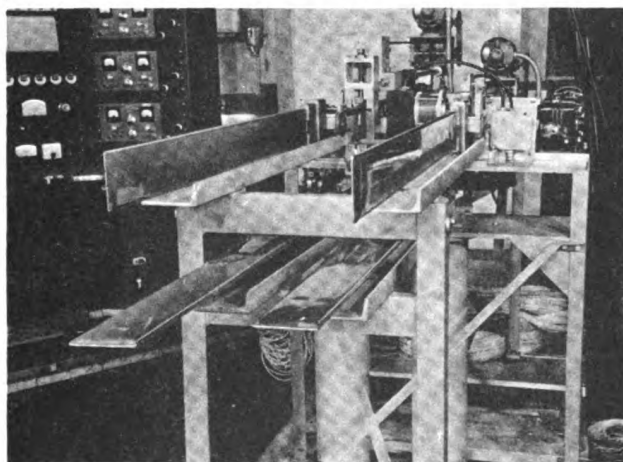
Control- and safety-rod assembly prior to installation.
